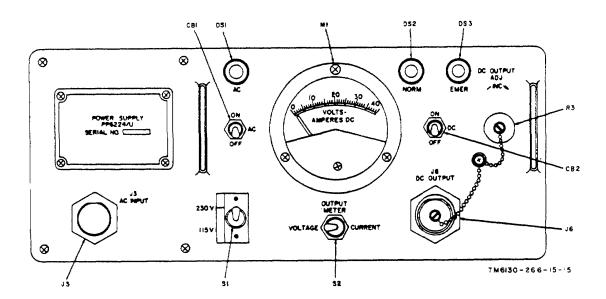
Power supply PP-622,/U front panel, parts location.
